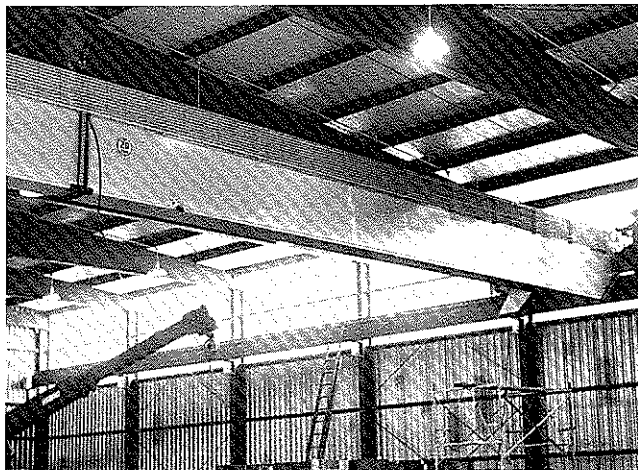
Securing Rear Girder by Fitted Bolts to End Trucks.
